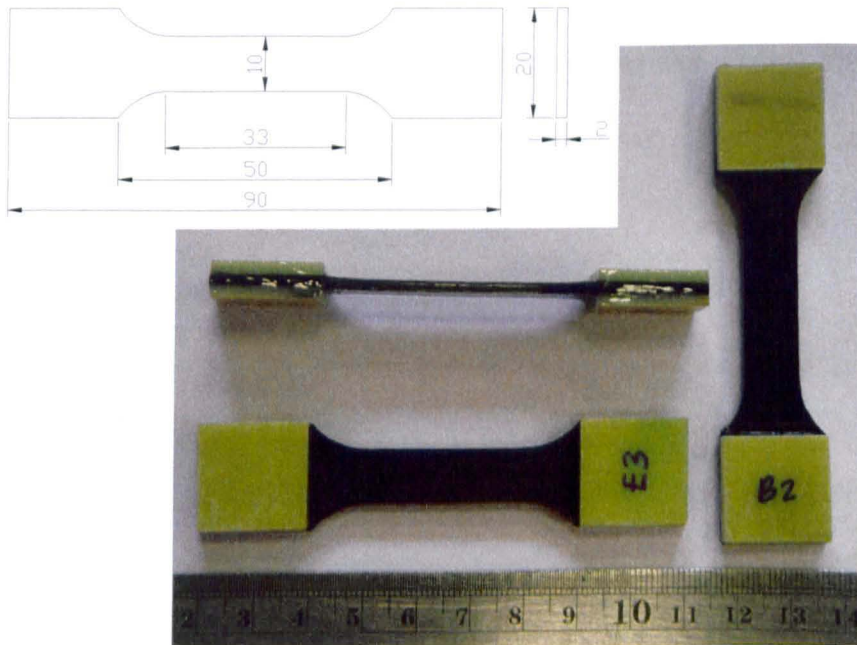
Dimensions and examples of the dogbone shape specimens.
